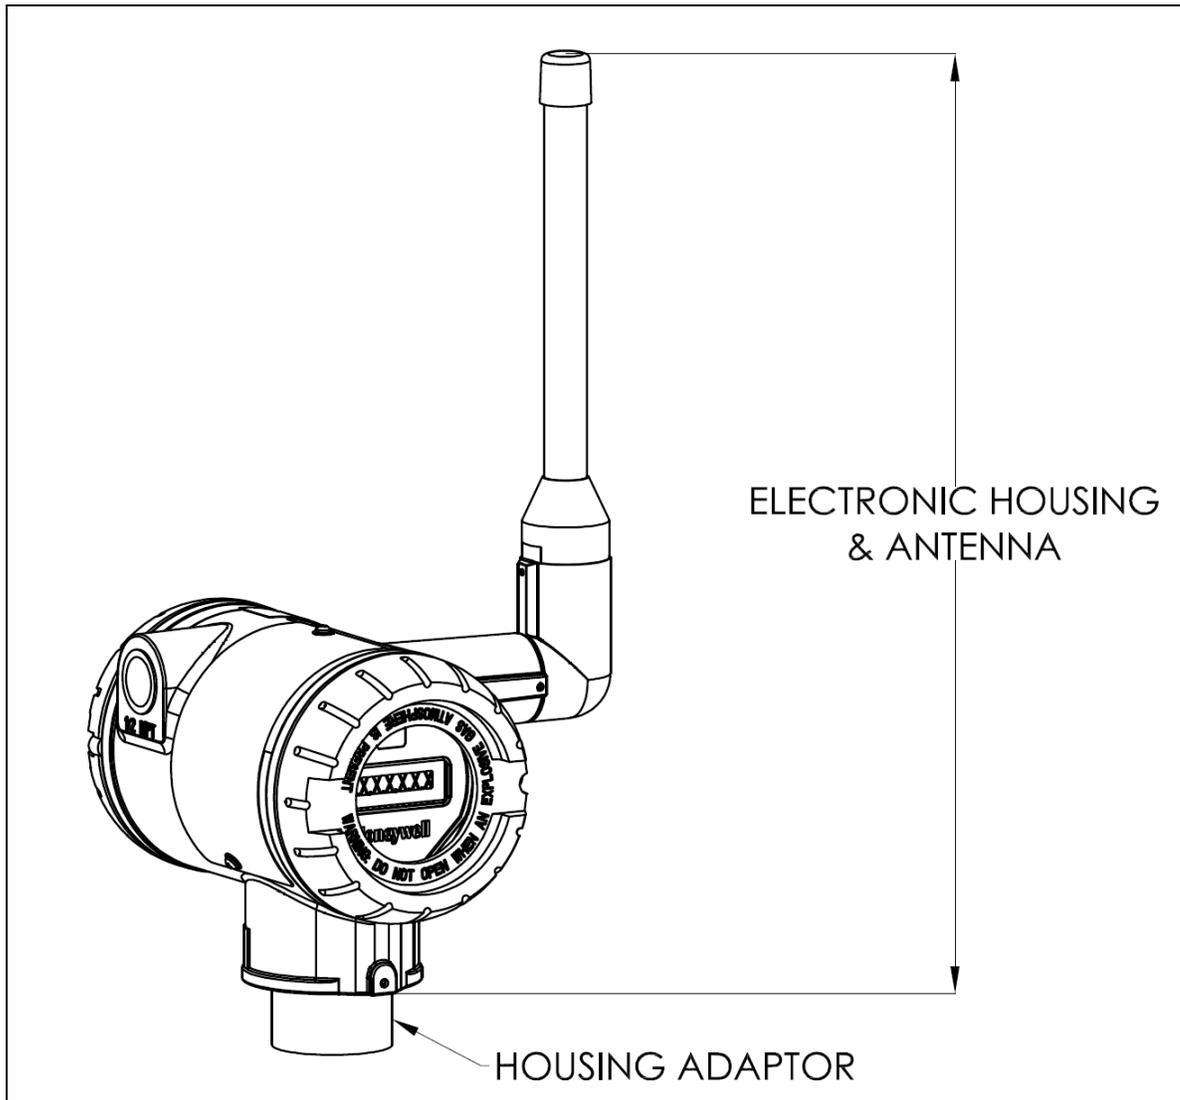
SmartLine Wireless Transmitter Major Assembly
